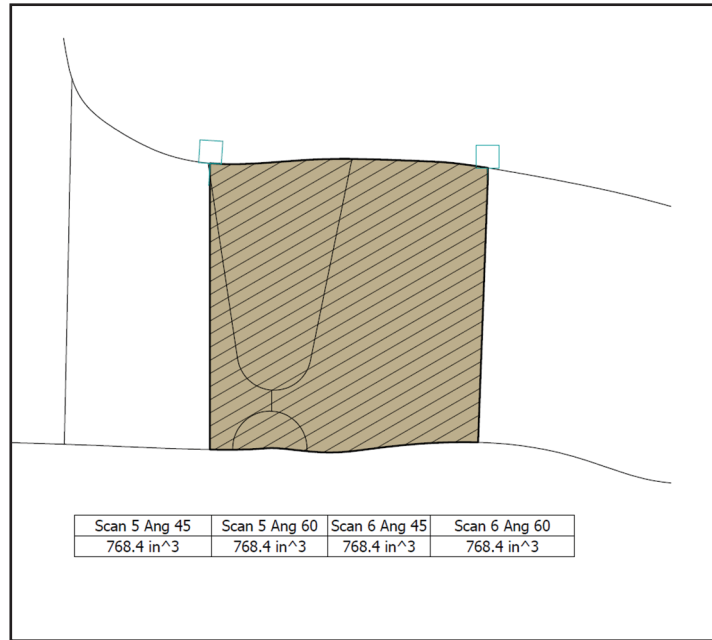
Weld RCW-21, 45° and 60° CW and CCW Scans
